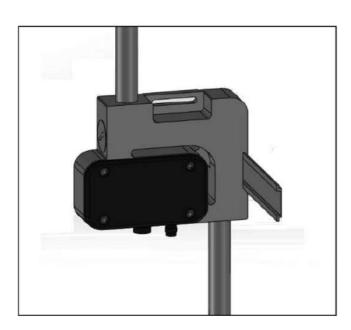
Mounting the BAMOFLONIC 42i on DIN Rail
